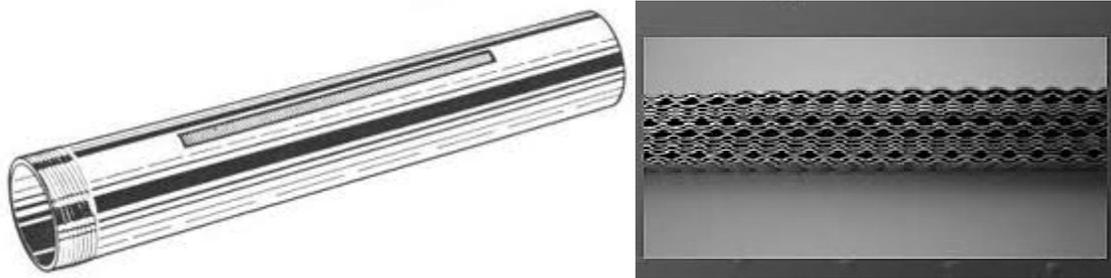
Ribbon Burner Pipe and Flame Holding Surface
